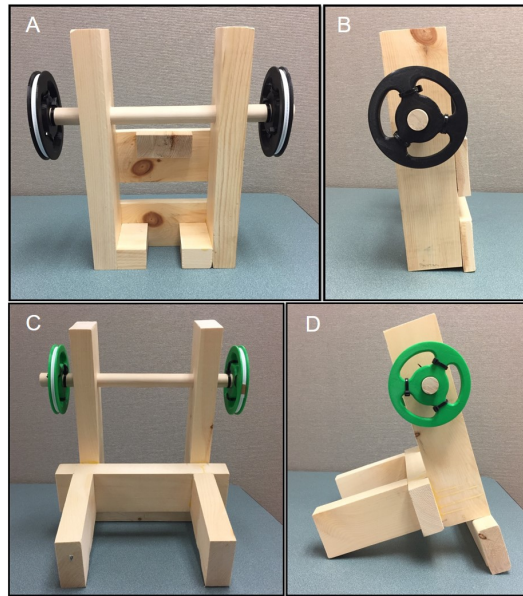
A) Front and B) side view of the angle mount pulley assembly, and C) front and D) side view of the sliding mount pulley assembly. Pulleys were 3D printed from PLA plastic, and designed to facilitate 4mm diameter static Nylon utility rope. Two 14" pieces of 2" × 4" were separated by a 1" diameter wood dowling. Pieces of 1" × 4" and 2" × 4" lumber were cut and glued for support and fit around the angle mount.
